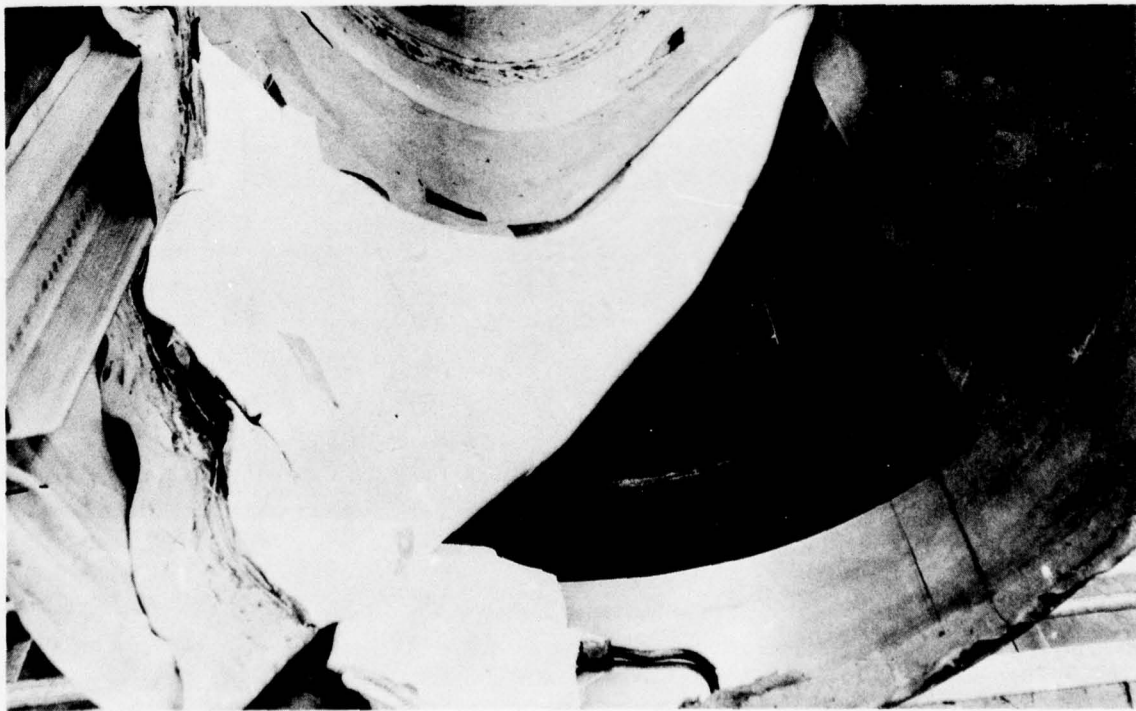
Skin Fusing Silicone Rubber Vacuum Bag Set-Up
